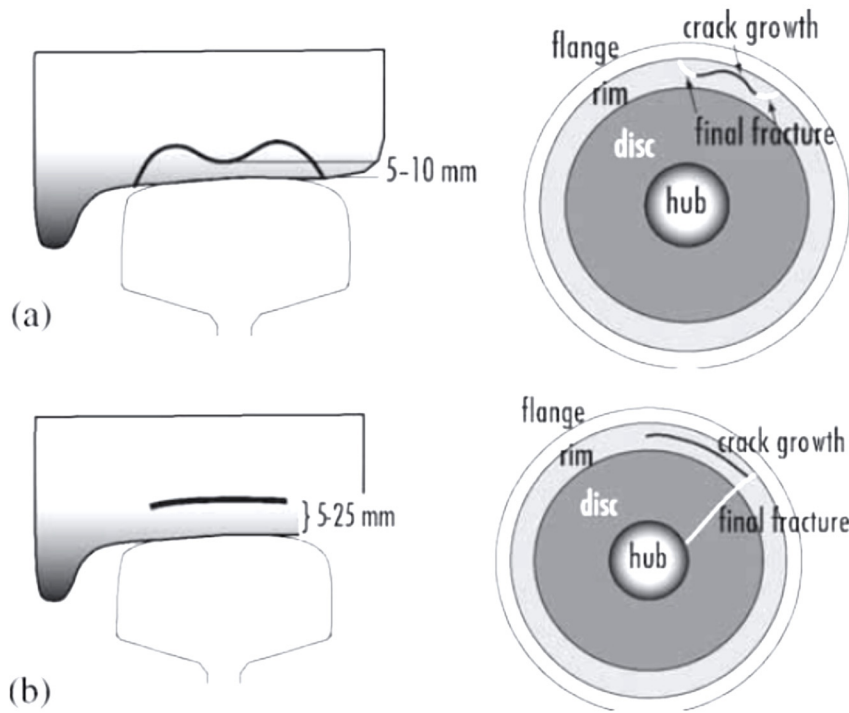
Typical appearance of subsurface fatigue cracks in railway wheels: (a) shallow initiation and (b) deep initiation at a defect [25]
